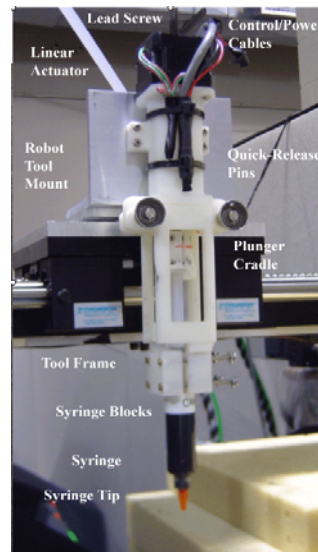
Picture of Deposition Tool with Disposable Syringe Attached (Mounted To Robot's Tool Platform)
